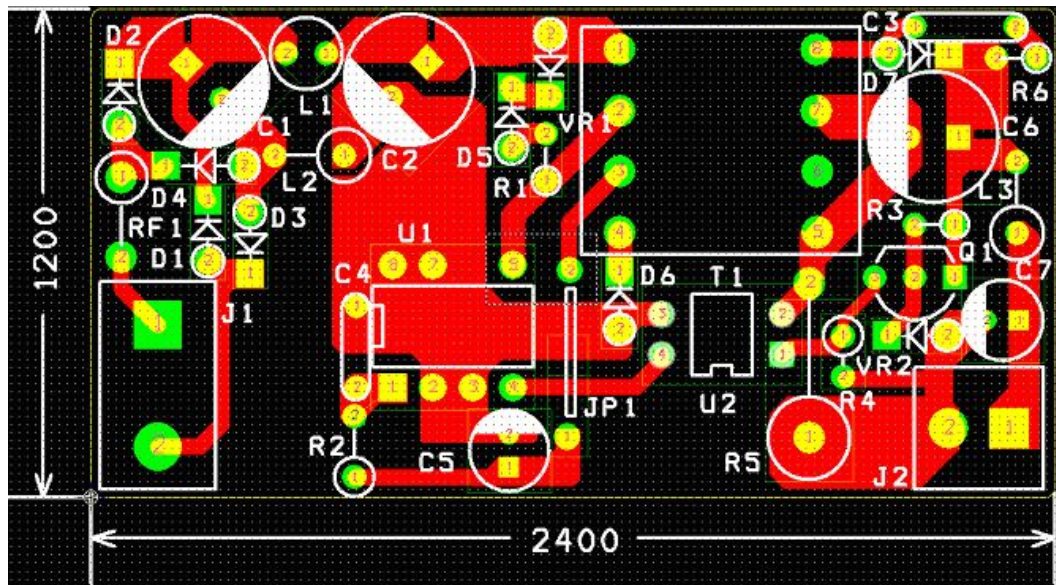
Printed Circuit Layout (dimensions 0.001”).
